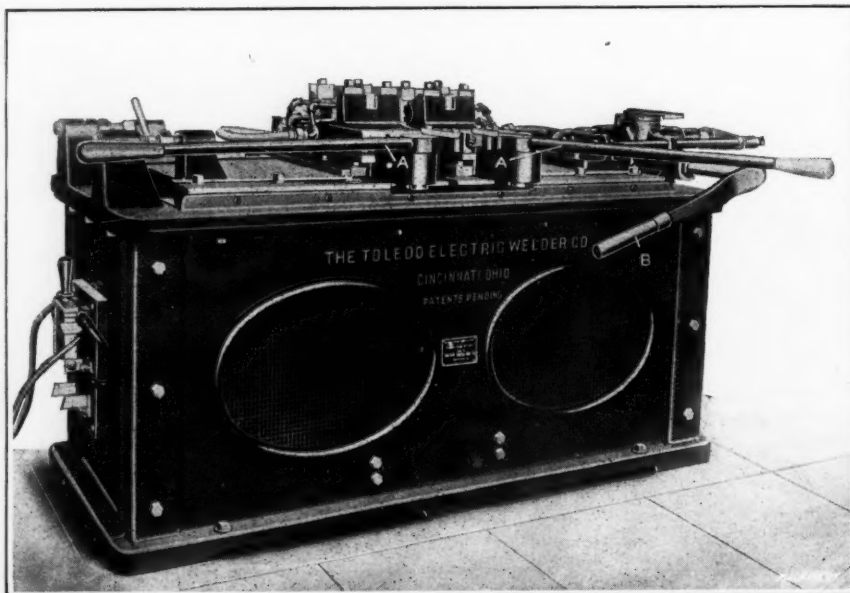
Special "Toledo" Electric Butt-welding Machine designed especially for welding Extra Heavy Pipe up to 2 Inches in Diameter
